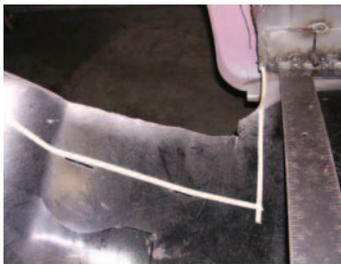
The front cut will also be perpendicular to the frame and preserves the outboard eight inches of the original floor to the forward inner wheel tub flange.
